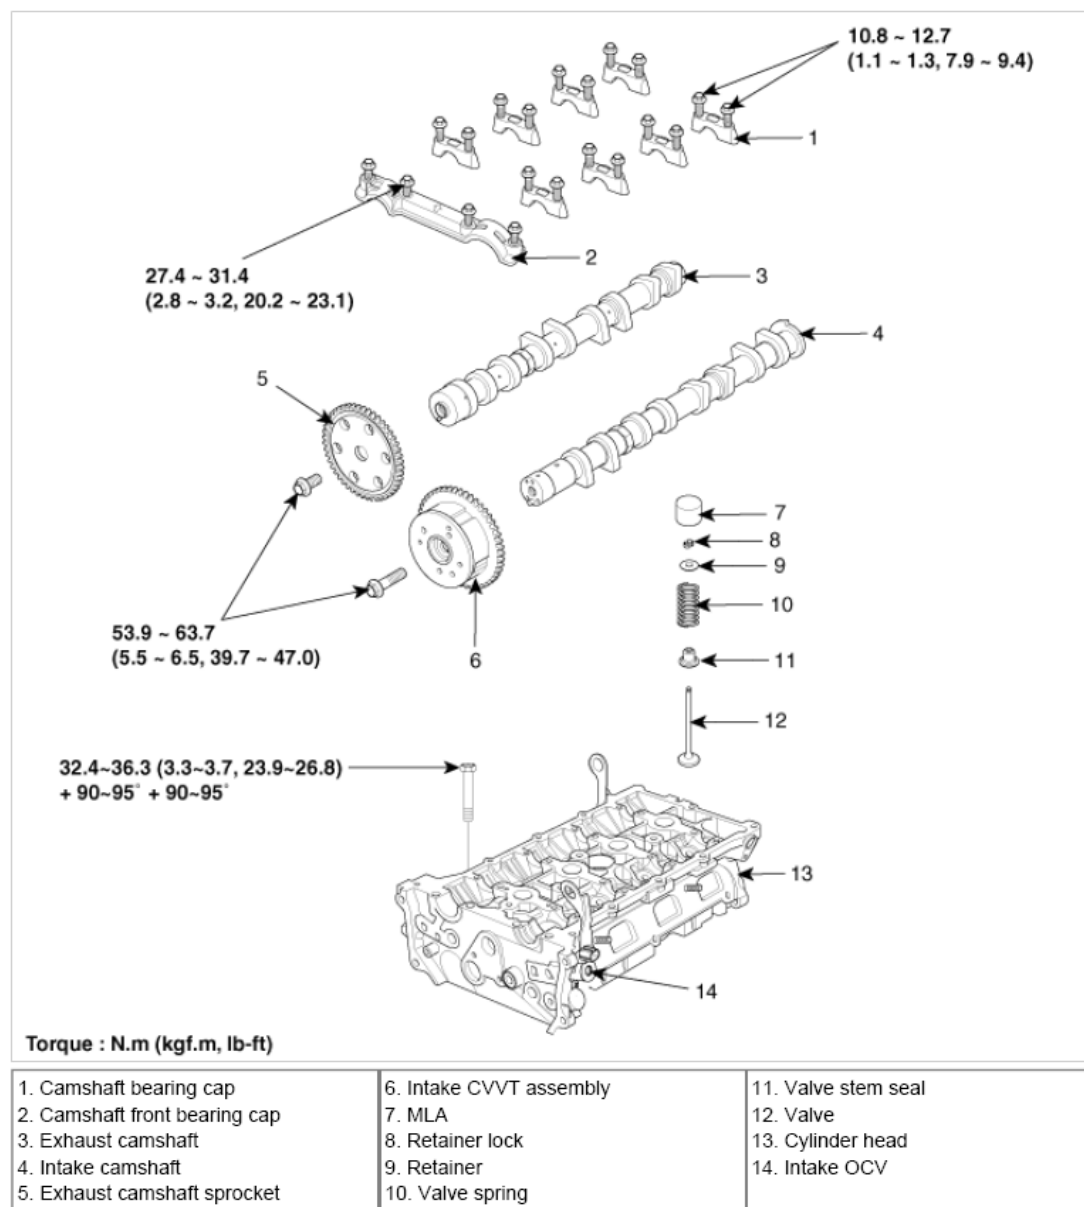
Exploded View Of Cylinder Head With Torque Specifications (2.0 ULEV- Single CVVT)
